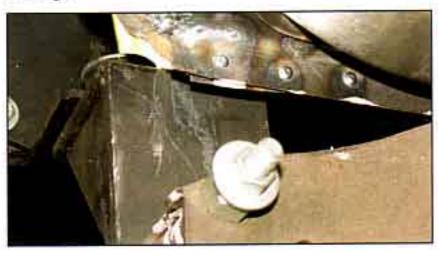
Now move to the bottom of the car and drill about ten holes in the front lip of the floor board and the rear lip of the toe board and plug weld the two panels together,
